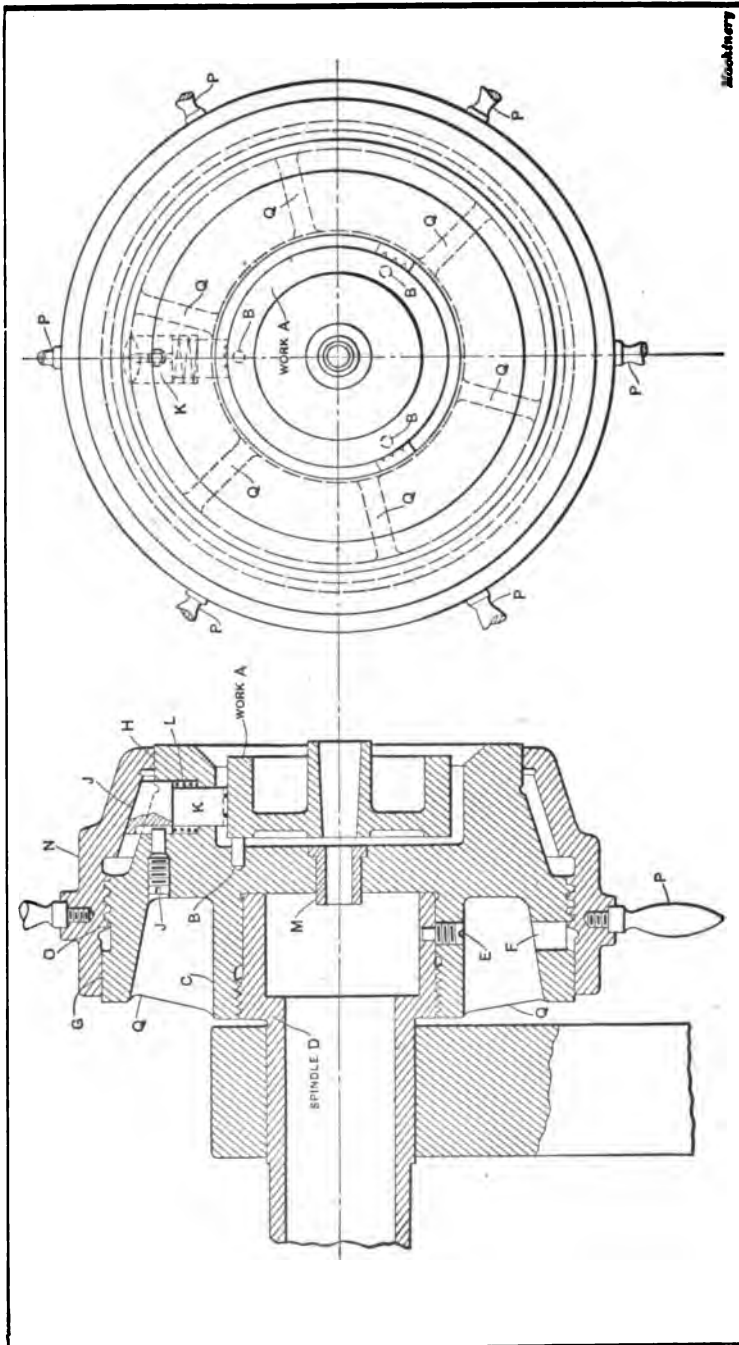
Special Type of Chuck with Clamping Pins for a Small Flywheel Casting
